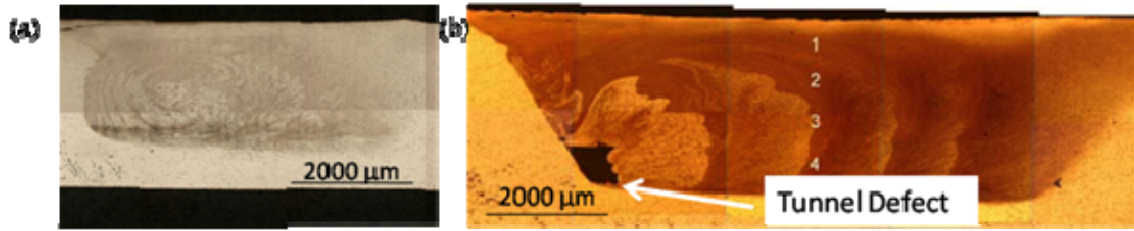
(a) Intact stir zone apparently free of macroscopic defects created by FSP at 800 rpm, 76.2 mm min^{-1} and a threaded pin. (b) Tunnel defect in lower corner of stir zone, created by FSP at 350 rpm, $101.6 \text{ mm min}^{-1}$ and a smooth pin. Material processed for Bland thesis work completed in 2006. From [16].
